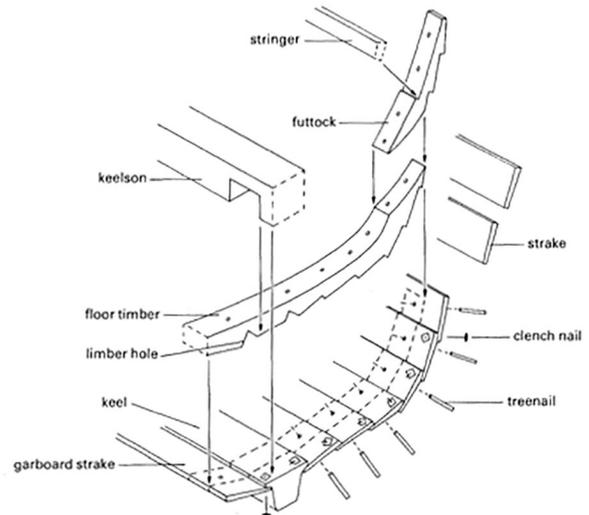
Reconstruction sketch drawing of construction details from Poole boat timbers (after Hutchinson, 1994 p. 25)
